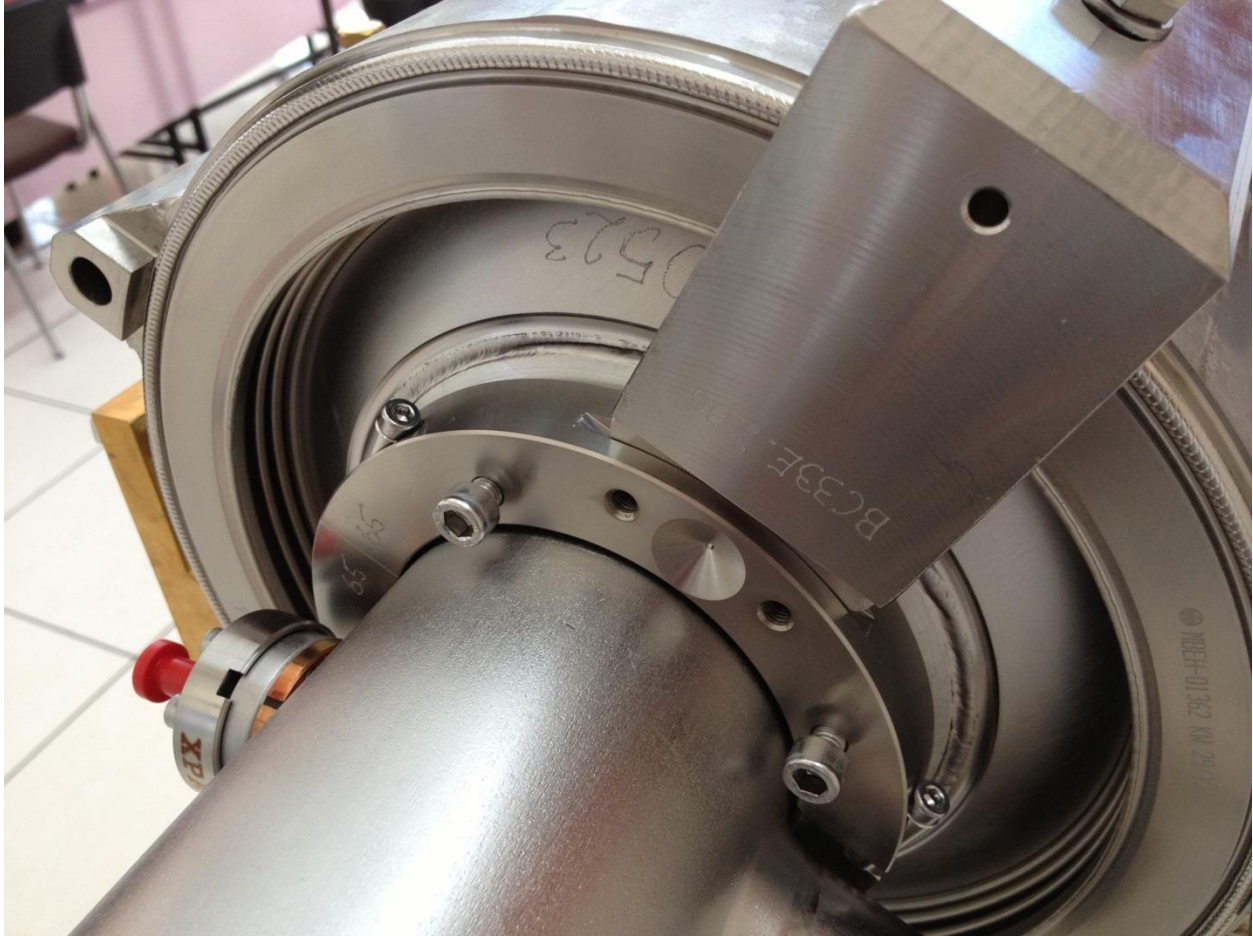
The other end of the He vessel, showing the support tab / slot, Ti weld (Zanon – the seam is clearly visible at the top center of the image) and vessel bellows.
